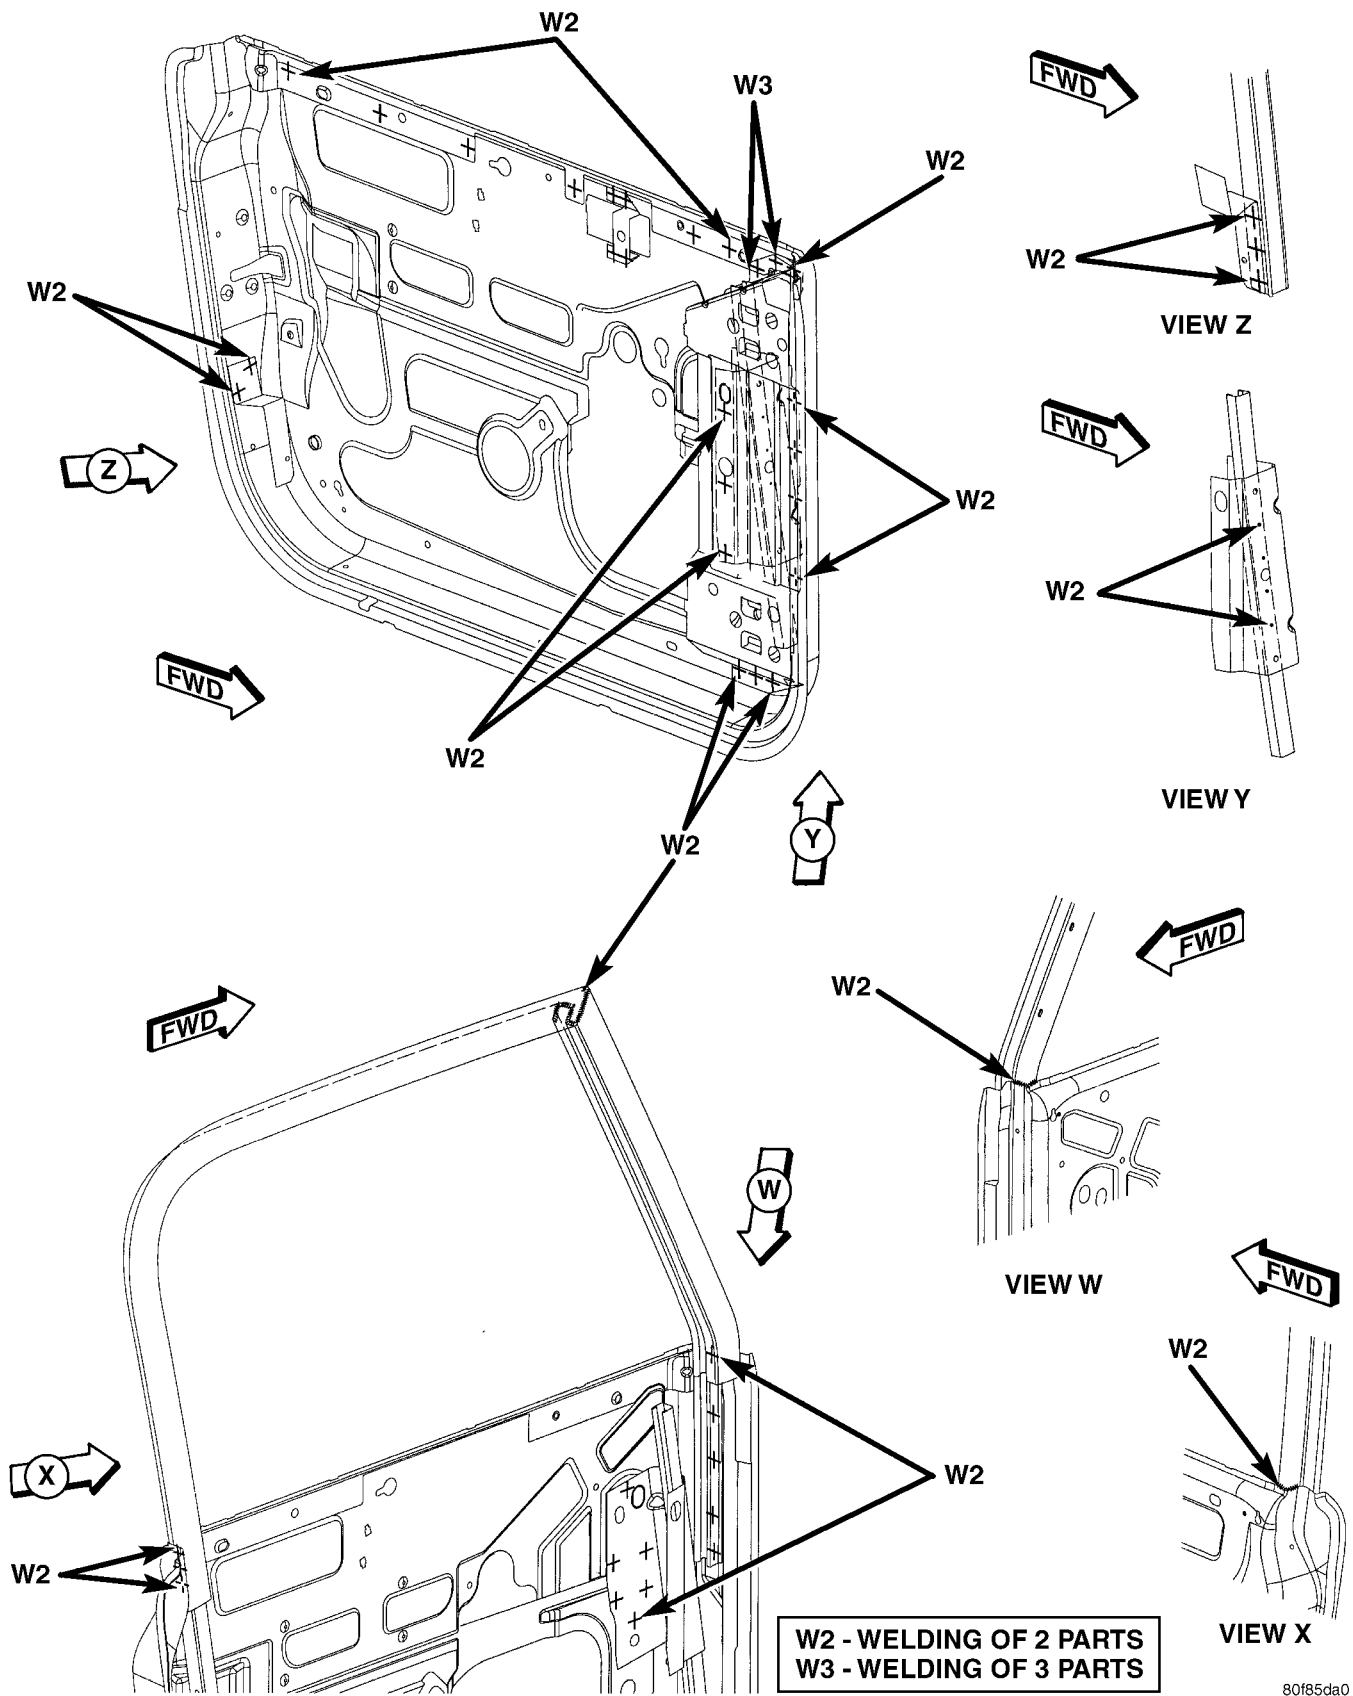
FULL DOOR ASSEMBLY (1 OF 2)
